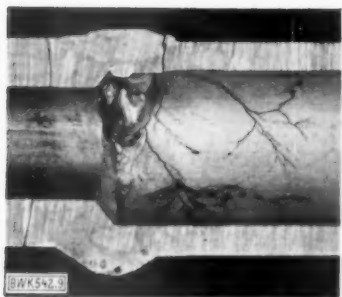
Test weld in tube assembly section with stress corrosion at the abrupt change of cross-sectional material.
